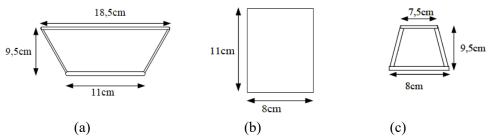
Prototype's deck construction sketch (a) side view; (b) top view; (c) front view
